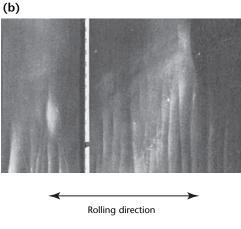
Coil weld is joint between two lengths of metal within coil. Coil welds are not necessarily visible in finished product.
